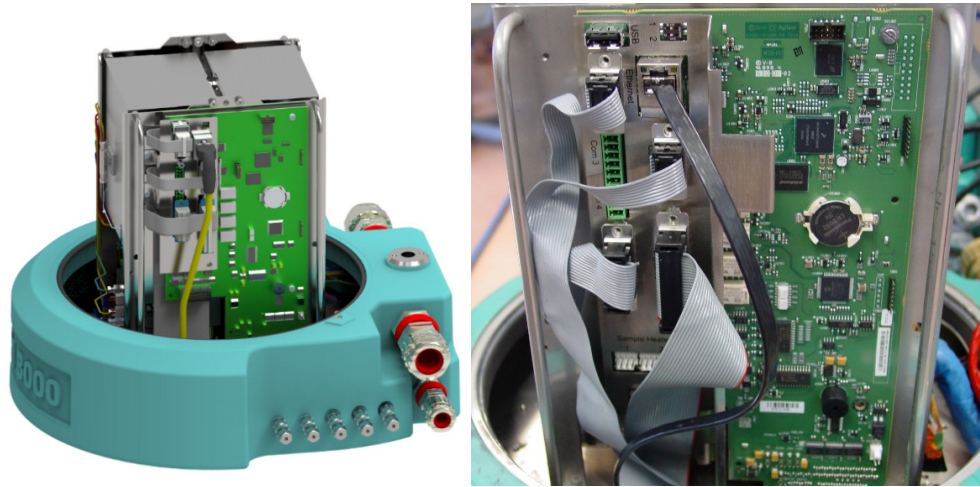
Processor board with ribbon flat cables mounted in the EnCal 3000
